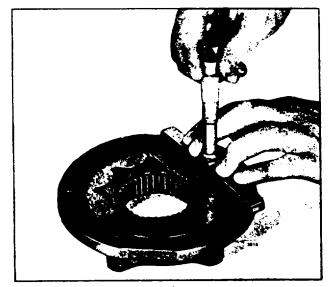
Measuring Clearance from Face of Pump Body to Side of Rotor
